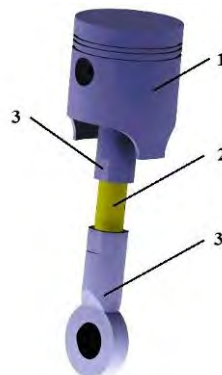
Piston group: 1 – piston, 2 – thread rod, 3. – rod end
